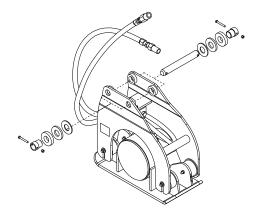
Configured with "XSF" Top Frame Typical Mounting Components Include: 1- Bolt, 2- Nut, 3- Flange Bushing, 4-Spacer, 5-mounting Pin (See Table 6.2)
